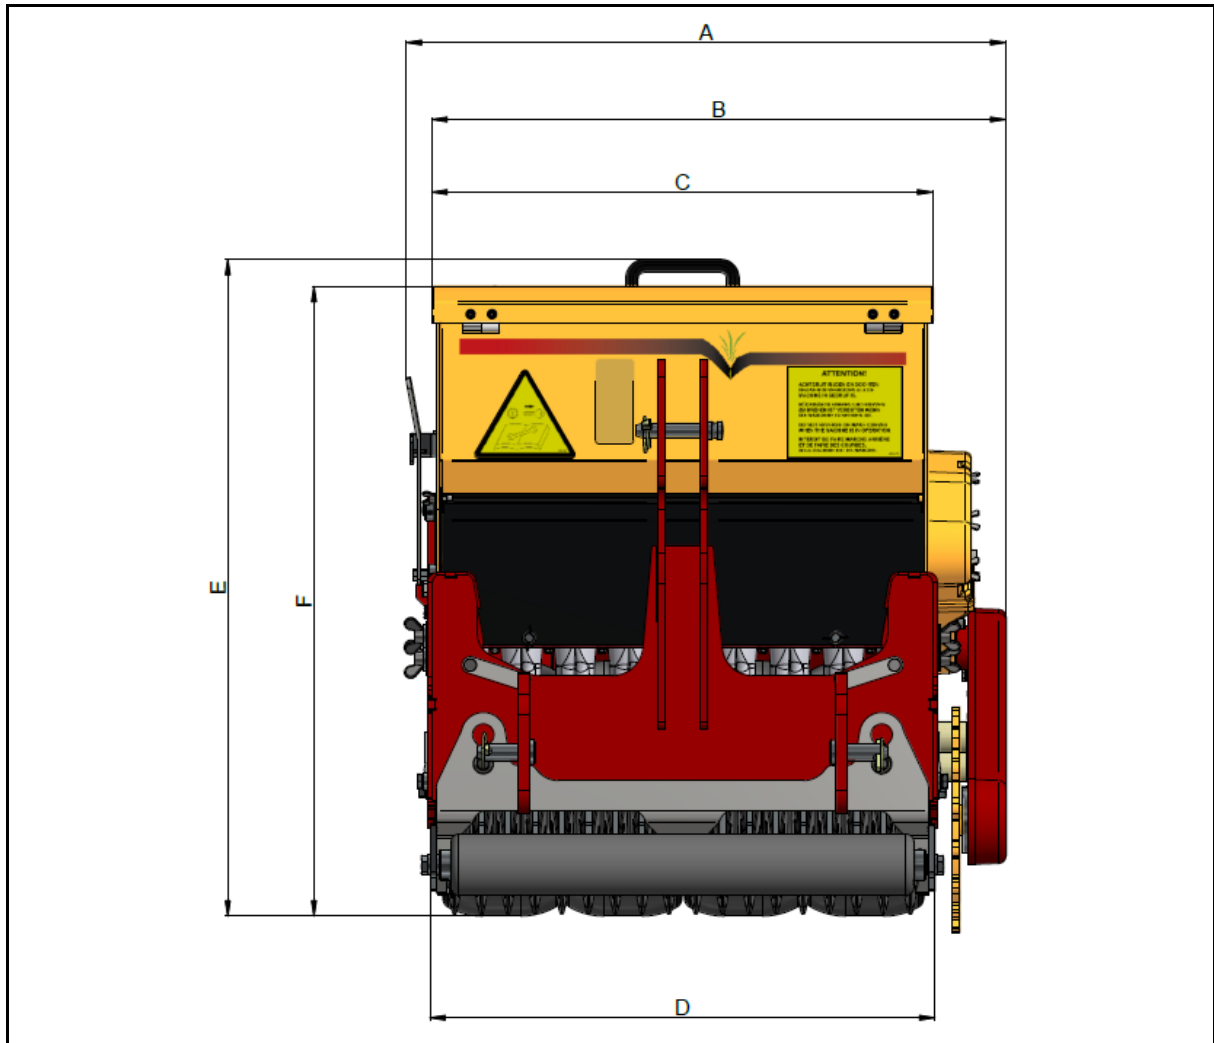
DZ5 Turf-Fix 65 overseeder - front view
